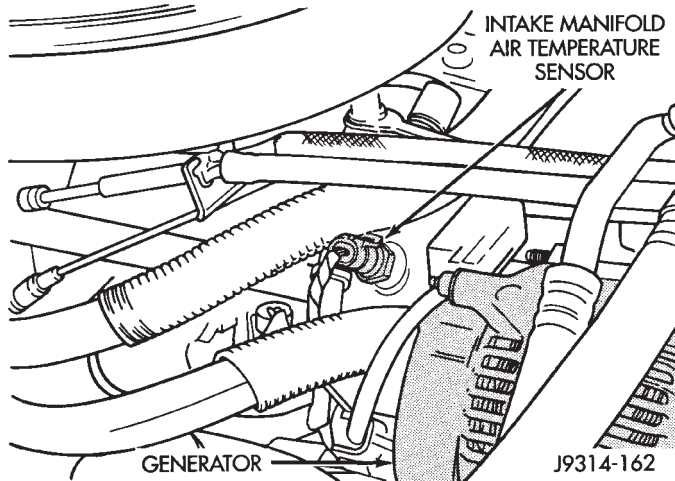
Air Temperature Sensor—5.2L/5.9LEngines—Typical
